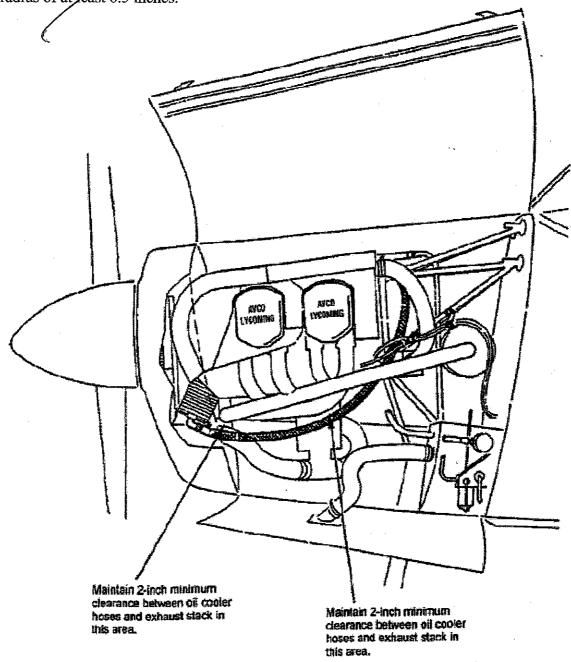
to paragraph (h)(2) of this AD: Acceptable clearances
